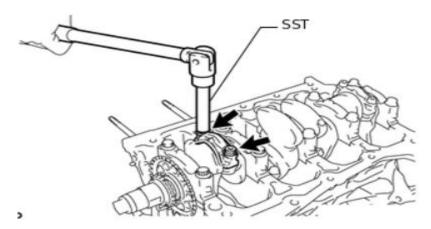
uniformly loosen the 2 connecting rod bolts
